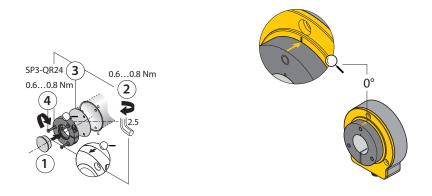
Mounting on large rotatable machine Fig. 10: Zero point default value part
